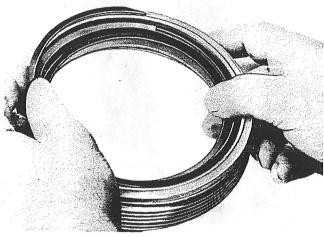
Installing Blade Retaining Nut Seal Snap Ring
